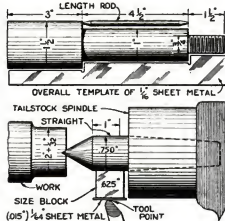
A template for turning duplicate parts, and a quick method of setting a tool
